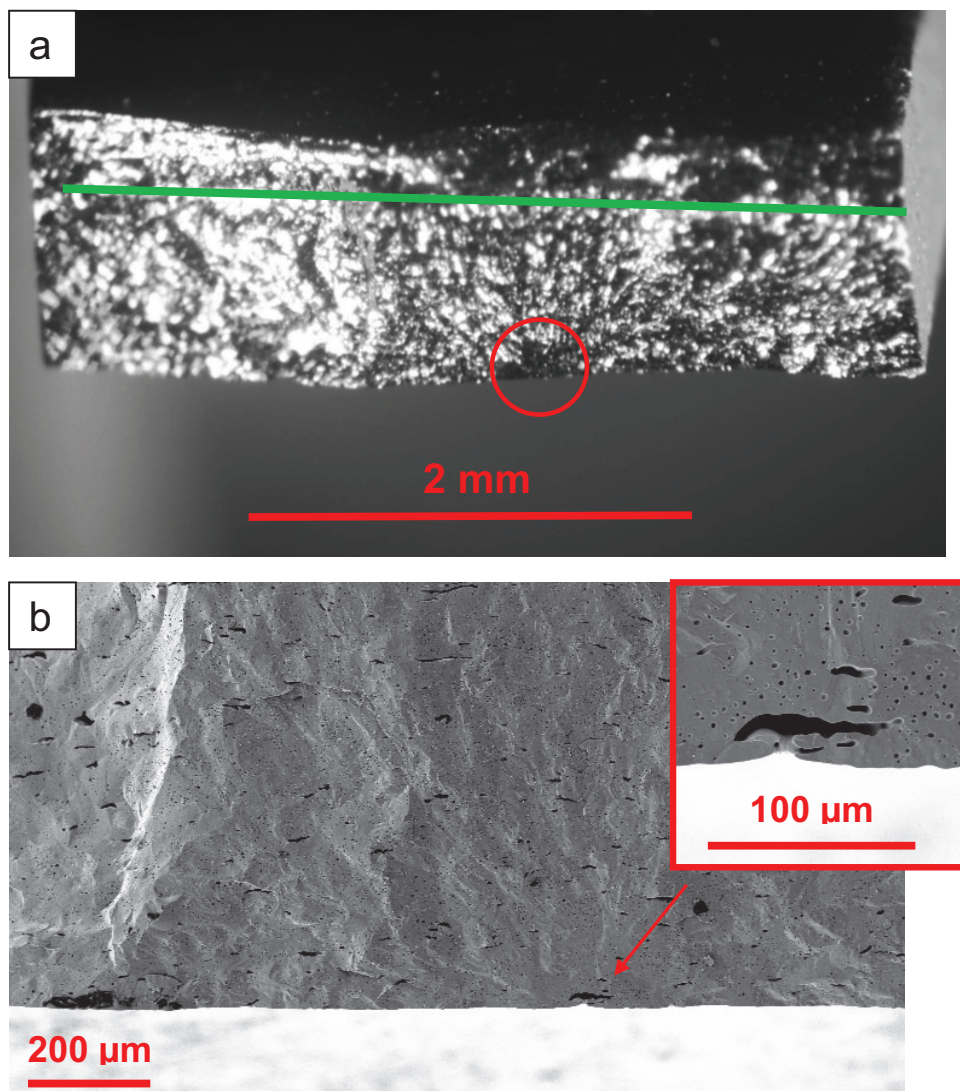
Fracture surface of the part 1 of specimen shown in Figure 45 a) overview of the fracture surface (stereoscopic LM), b) region of interest in higher magnification (SEM). Elongated pore localized below the sample surface (probable fracture origin) is indicated by a red arrow [120].
